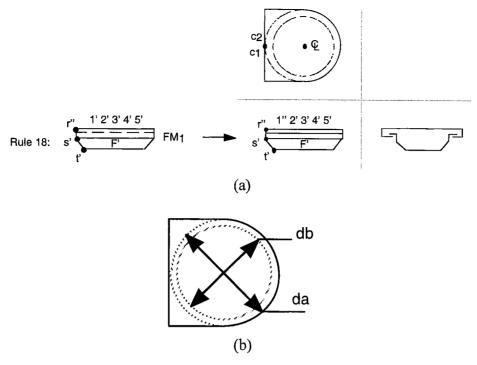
(a) Shape rule creating a sliding filter unit; (b) top view created by the shape.
